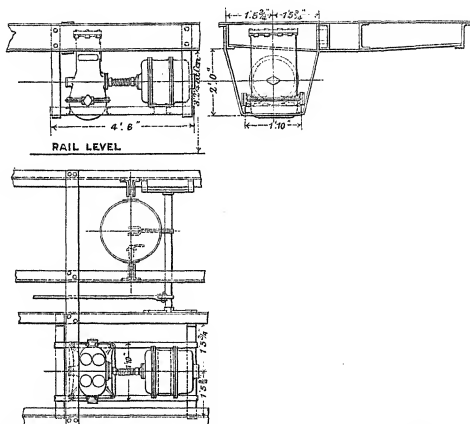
Arrangement of motor-driven exhaustor for the Midland Railway Co.'s electric stock. (Vacuum Brake Company.)
